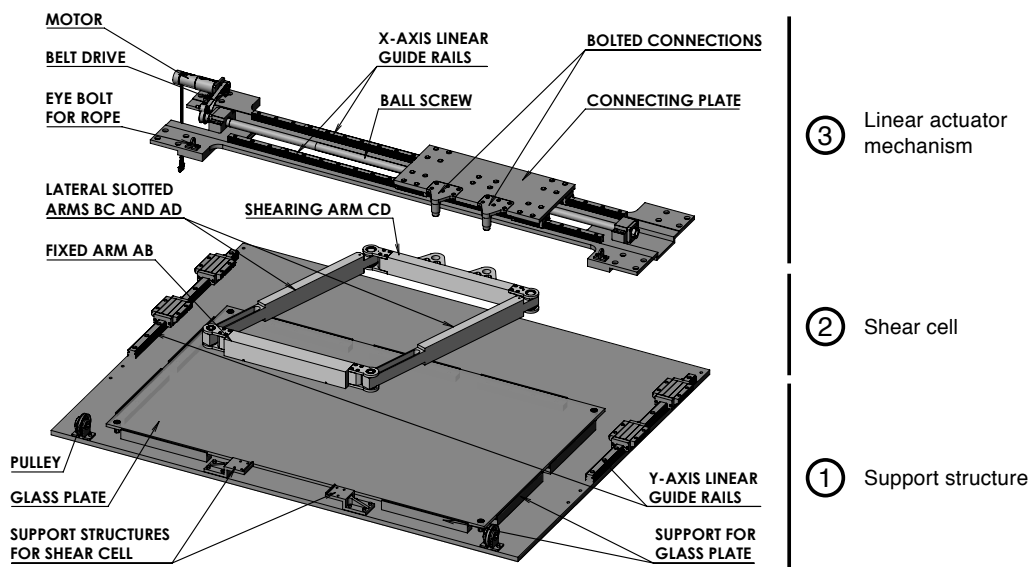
Exploded view drawing of the experimental shear apparatus
